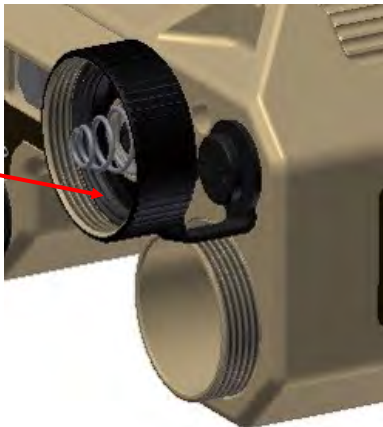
Inspecting and Replacing O-Rings
